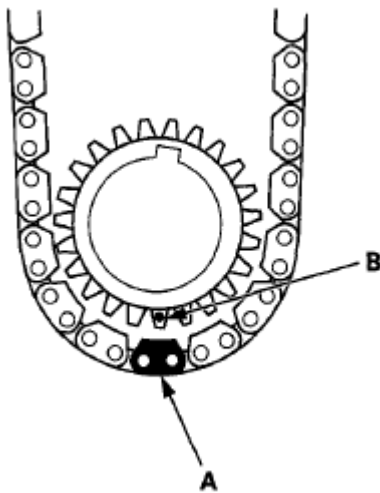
Aligning TDC Mark On Crankshaft Sprocket With Pointer On Oil Pump
